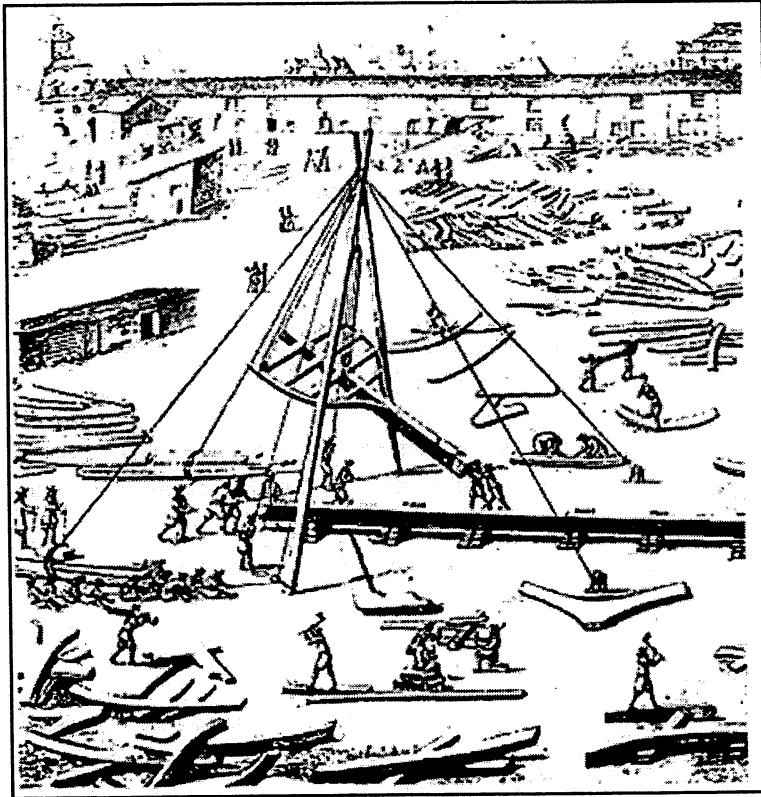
Detail from Plate 1 of the *Album de Colbert* showing the method of erecting the stern assembly. (*Album de Colbert*, 1988)
